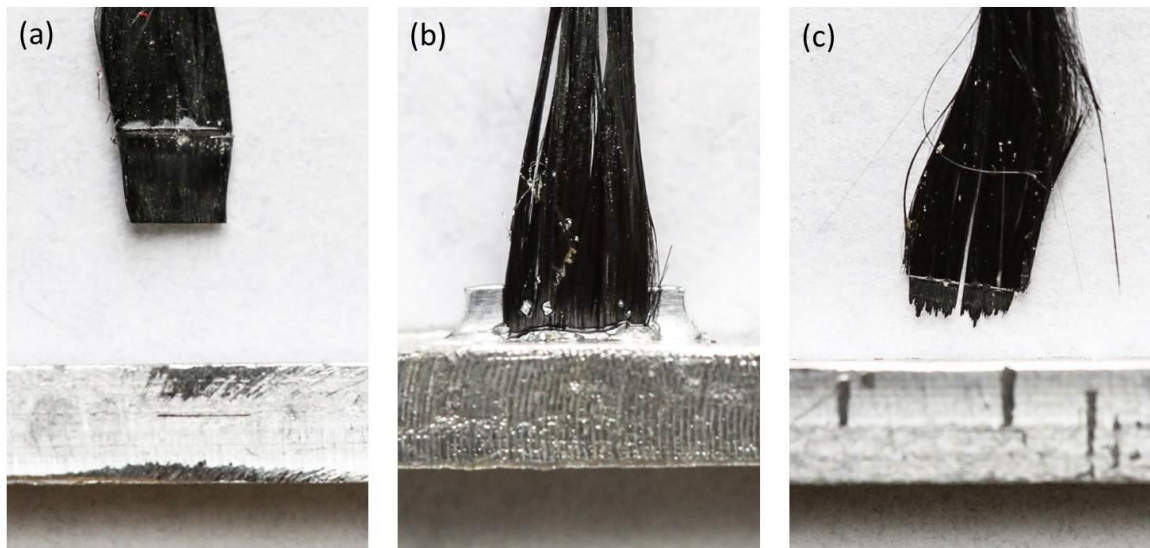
Three different failure modes seen in CF - Al pullout specimens wetted with epoxy. (a) Specimen E3, complete pullout from joint; (b) Specimen E4, failure in the fiber gauge length - no joint failure; (c) Specimen E5, brittle failure near the front edge of joint.
